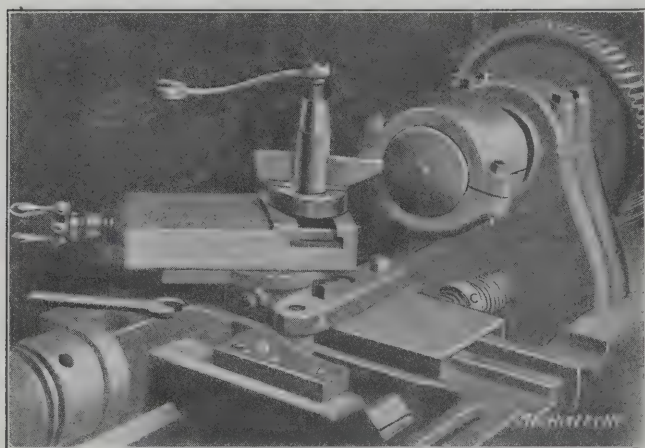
Lathe equipped with Forming Slide for Turning Spherical End of Piston
